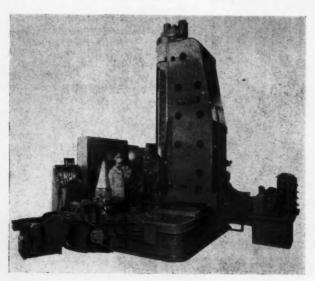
BarnesdriL numerically-controlled drilling and tapping machine for operations on cylindrical and conical parts
